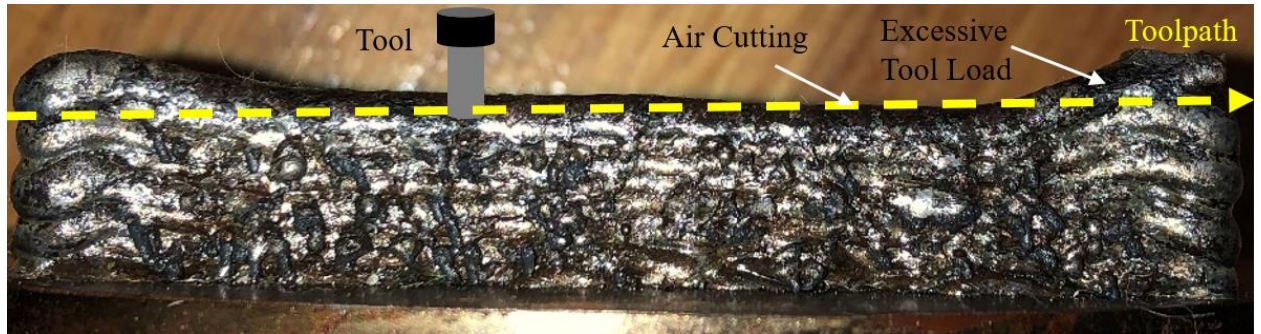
Air Cutting and Excessive Tool Load in Facing Toolpath for Wire DED Geometry
